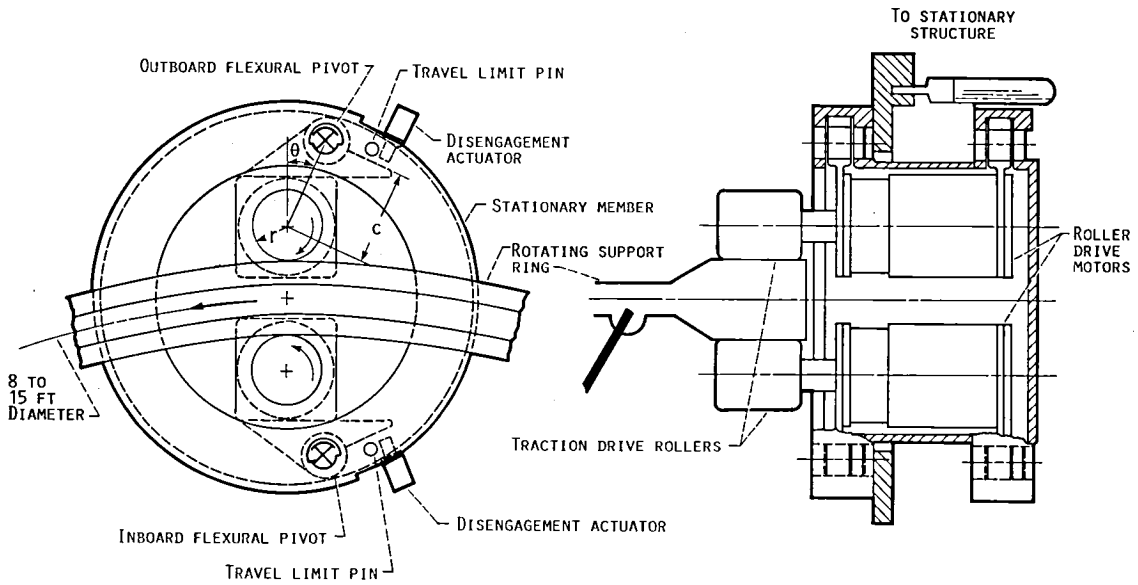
DETAILS OF SELF-LOADING PINCH ROLLER DRIVE MECHANISM.
